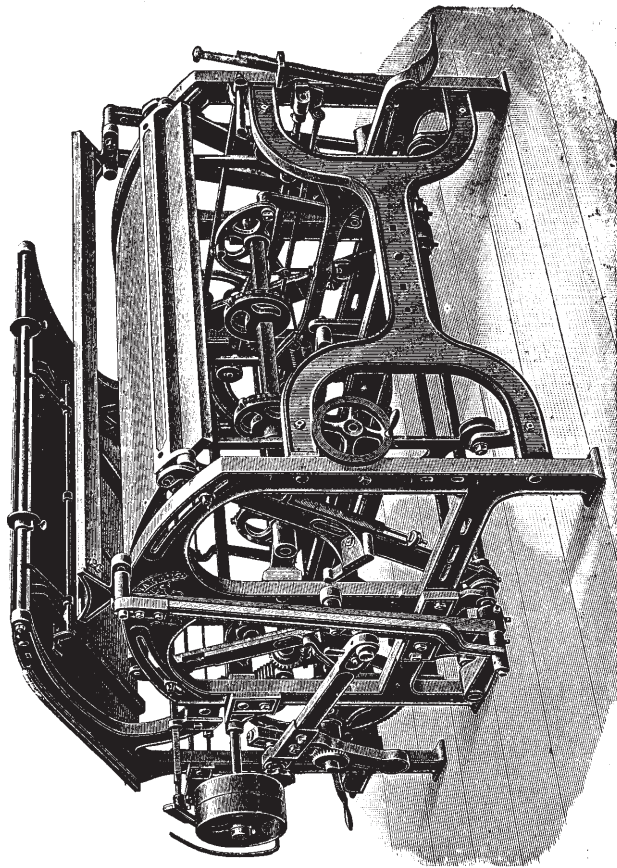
IMPROVED CLOTH PLATING MACHINE.
